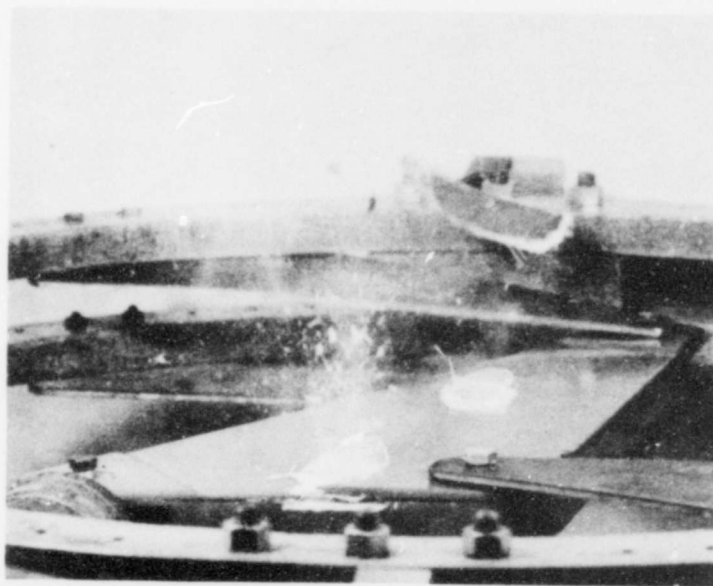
Delamination of Exit Face Sheet Caused by Tumbled .30 Caliber Impact.
